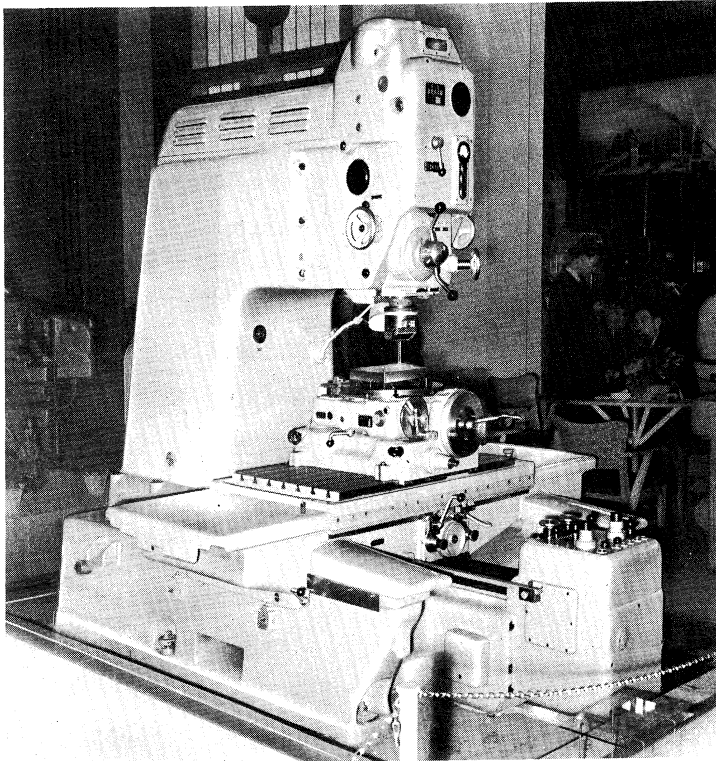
T 463 Jig Borer made in China. Table size 43 x 24 in. Table moves on rollers over hardened steel strips.
